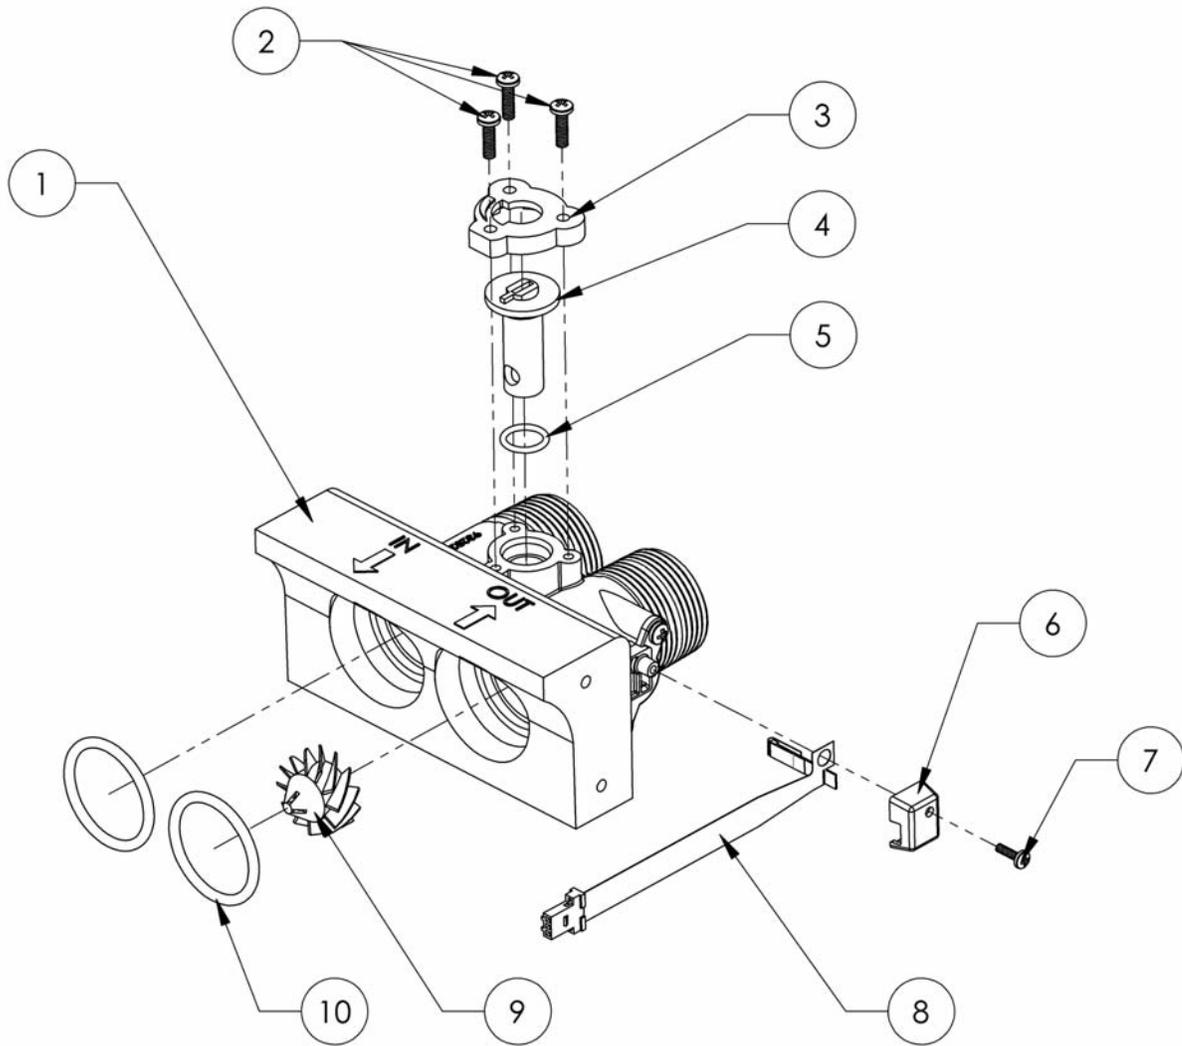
1" I/O Adapter Assembly with Blending Valve
